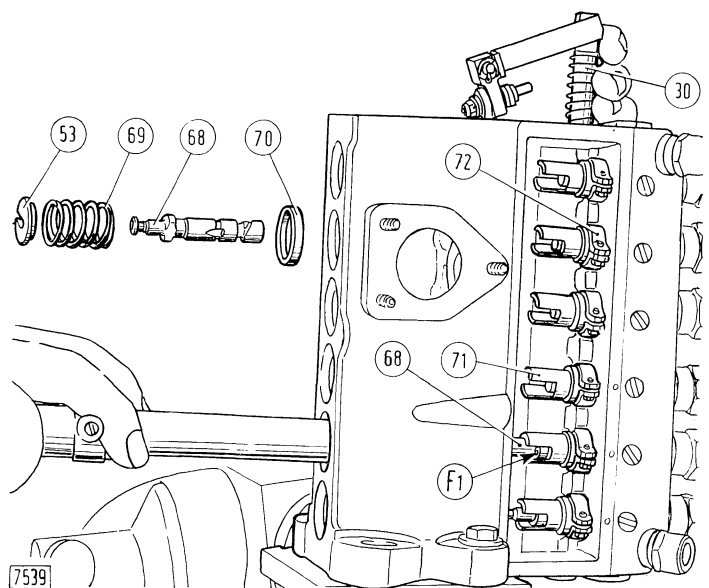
Refitting (or Removing) the Plungers using tool A. 65018 (291191)
